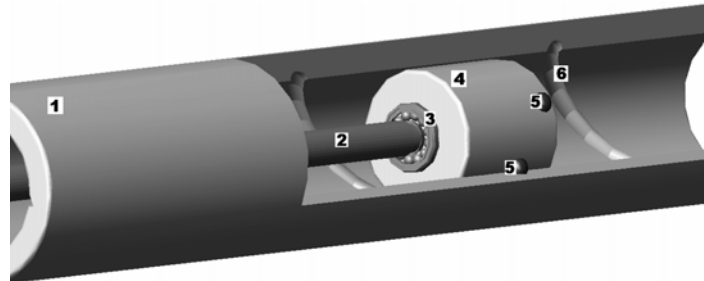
Schematic of the angular motion inducing mechanism: 1-pipe, 2-pneumatic cylinder rod, 3-bearing, 4-capsule enclosing IMU, battery and RF transmitter, 5-ball bearings aligned in a helical pattern over the surface of the capsule, 6-helical thread machined on the interior surface of the pipe.
